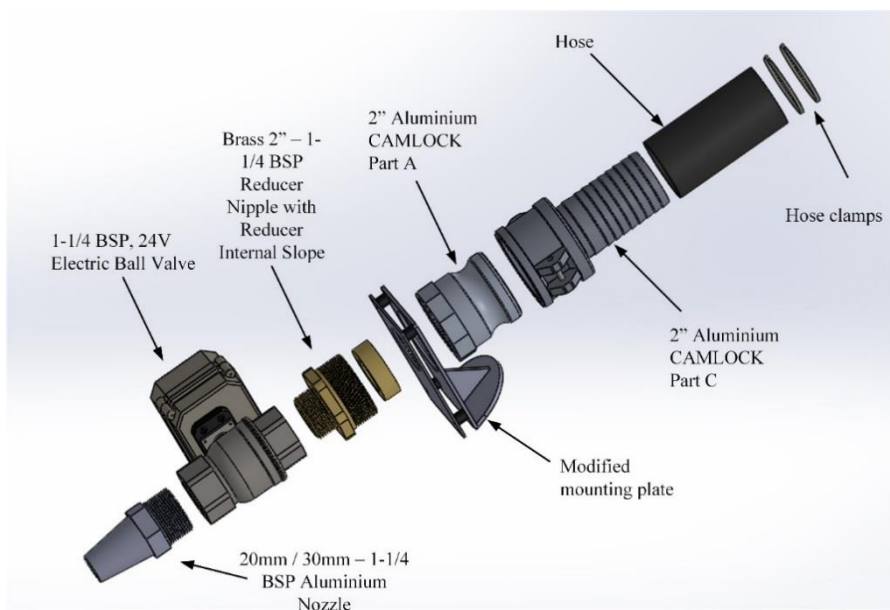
Exploded view of the extruder assembly that is connected to the progressive cavity
